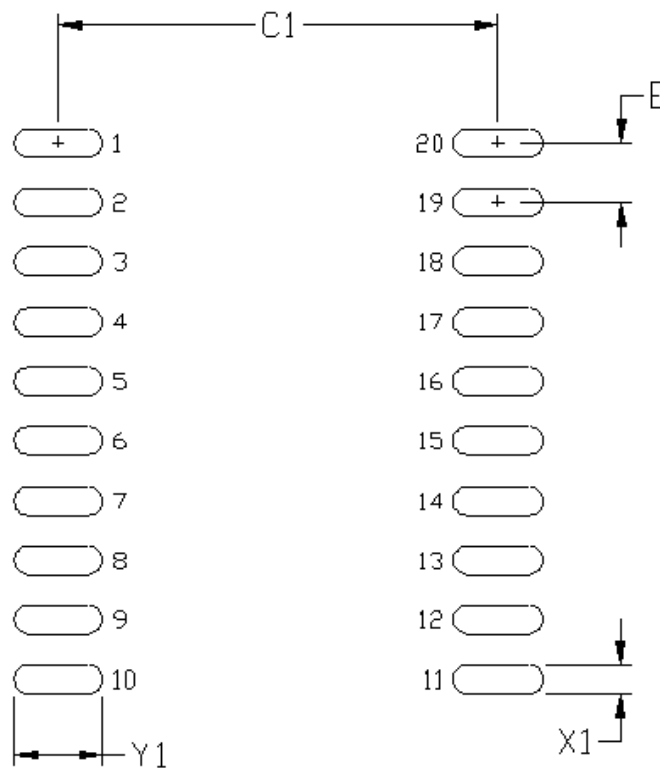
20-Pin SOIC PCB Land Pattern Drawing
